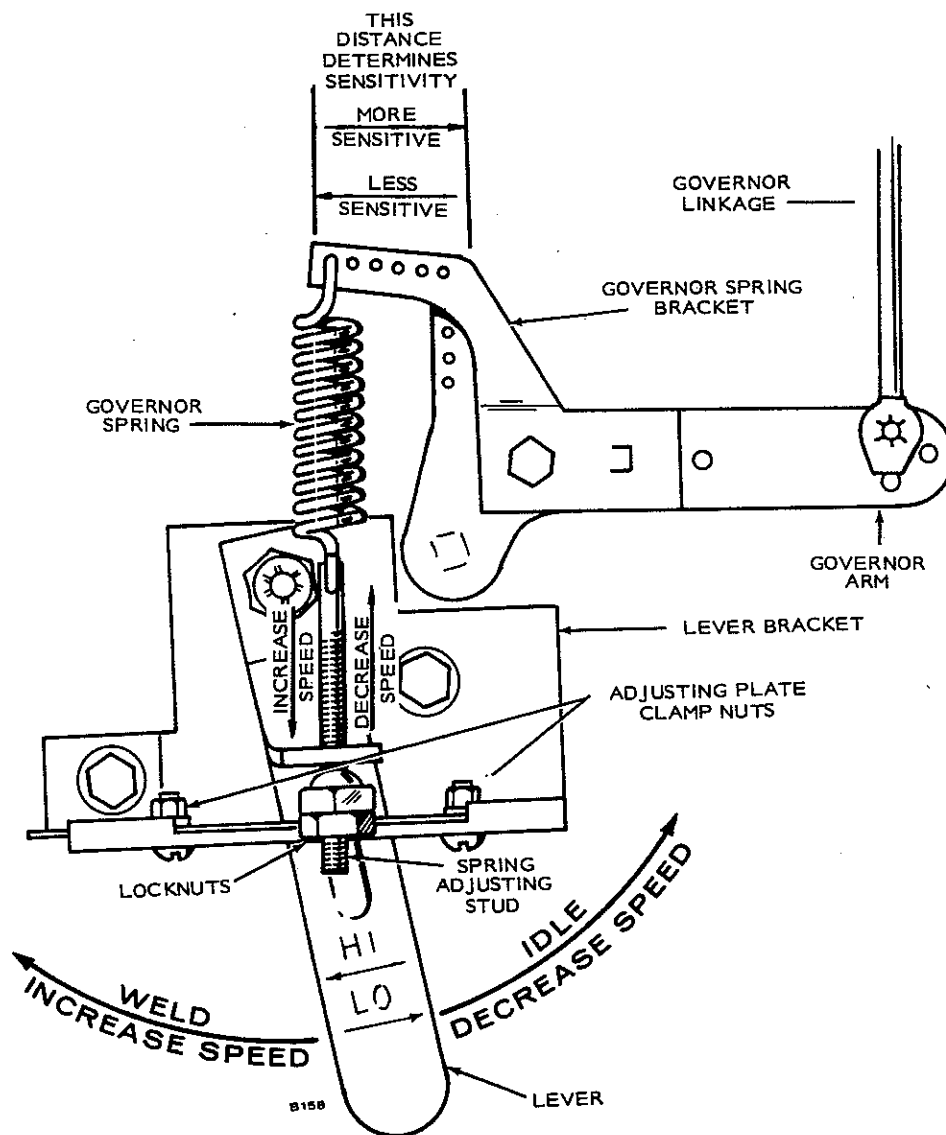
BF WELDER GOVERNOR ADJUSTMENTS
